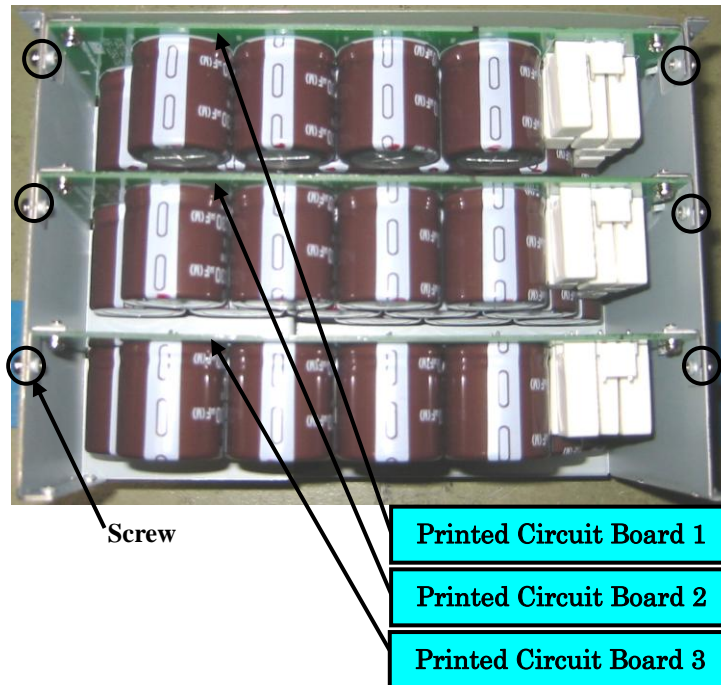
Removing PCB 1, 2, and 3 from PPD2960
